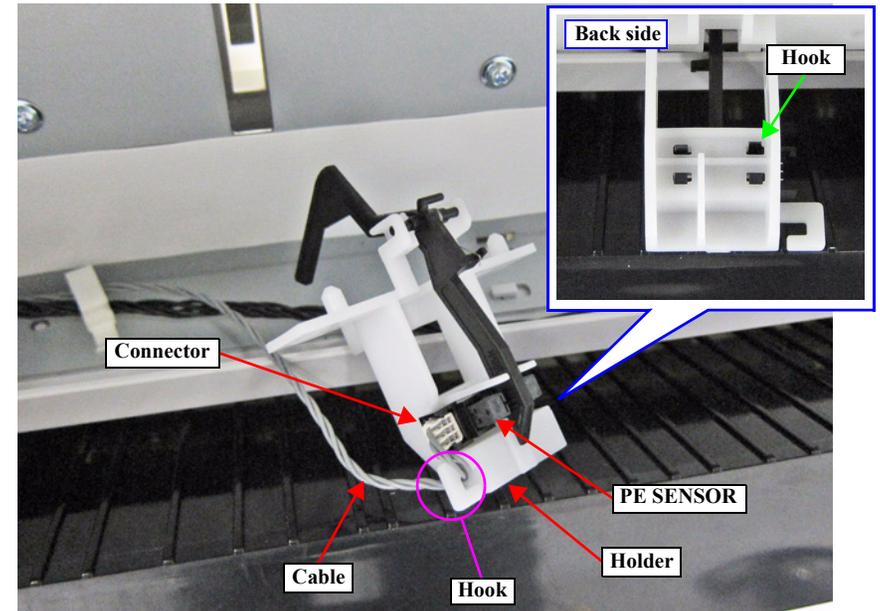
Removing the PE SENSOR (ROLL PAPER)
